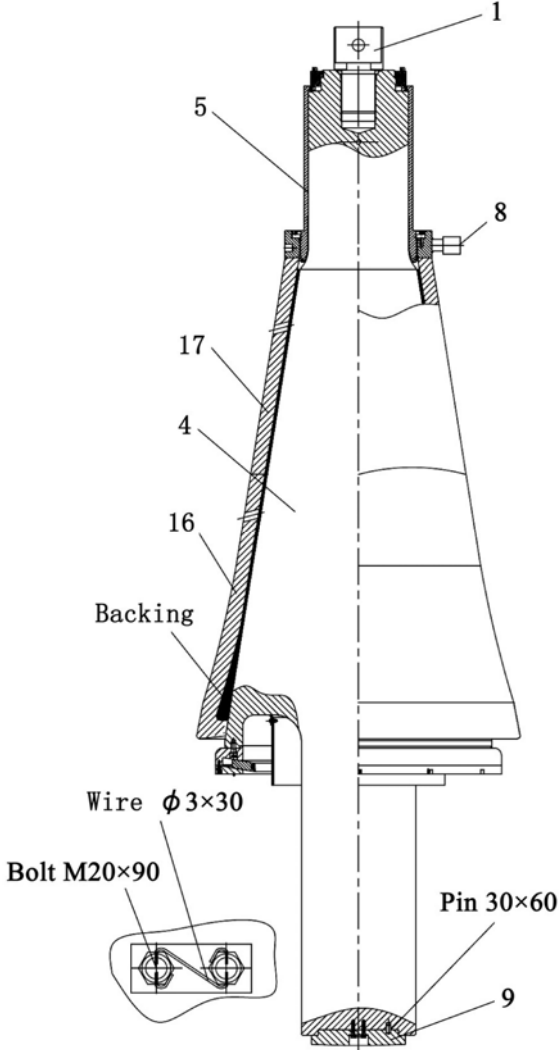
Main shaft structure of PXZ-1500II crusher
